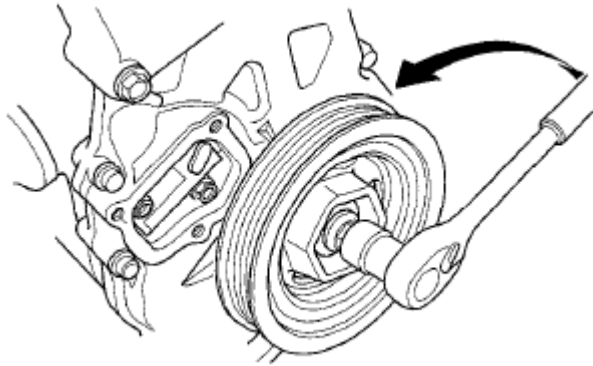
Identifying Crankshaft Counterclockwise Auto Tensioner
